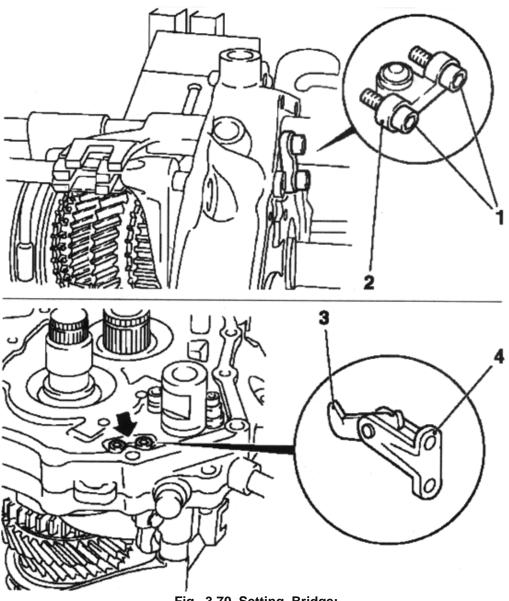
Setting Bridge: 1 - clamping bolts 2 - bridge; 3 - Latch, 4 - bearing bearing
